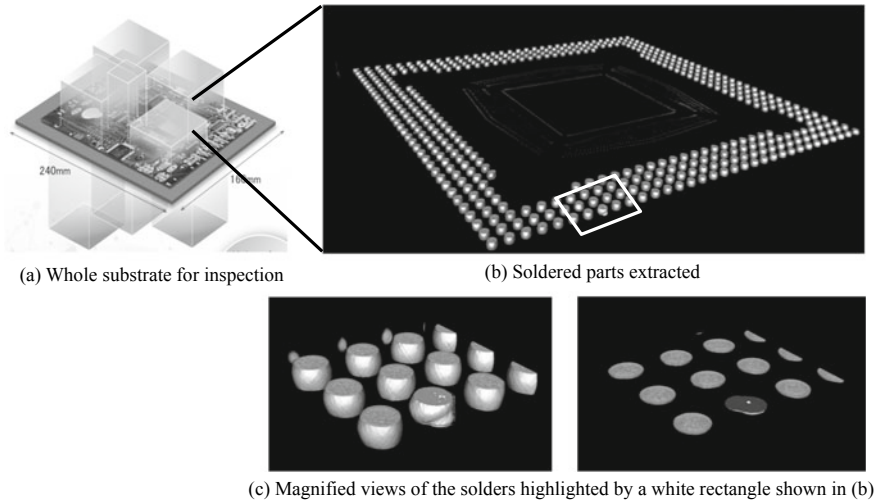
Inspection example of a soldered section of the electric circuit using a commercially available in-line inspection X-ray CT scanner (Omron VT-X750 model) shown in Table 6.1 (courtesy of Nobuharu Sugita of Omron)
